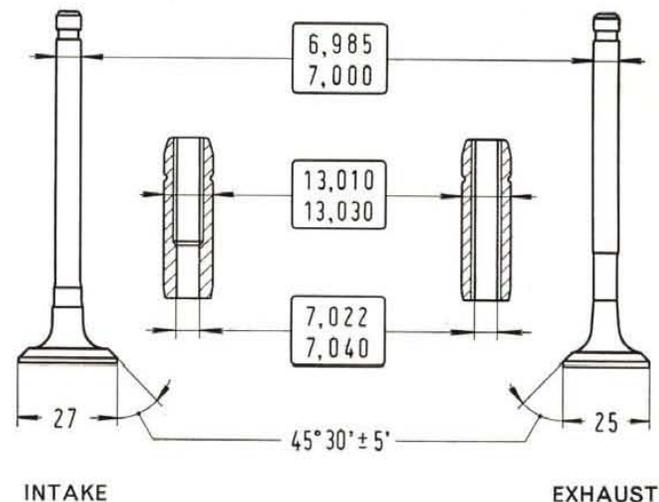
Critical dimensions (metric) of intake valves, exhaust valves and valve guides.
